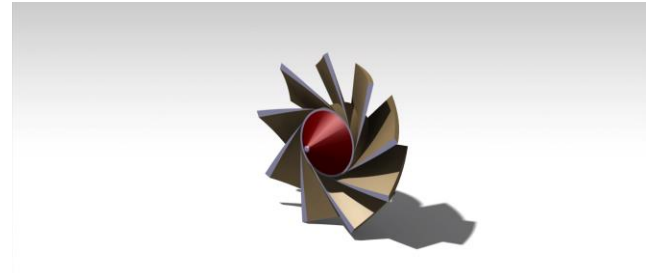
This is an isometric image of the finished CATIA V5 composite propeller/rotor assembly with eight blades.
